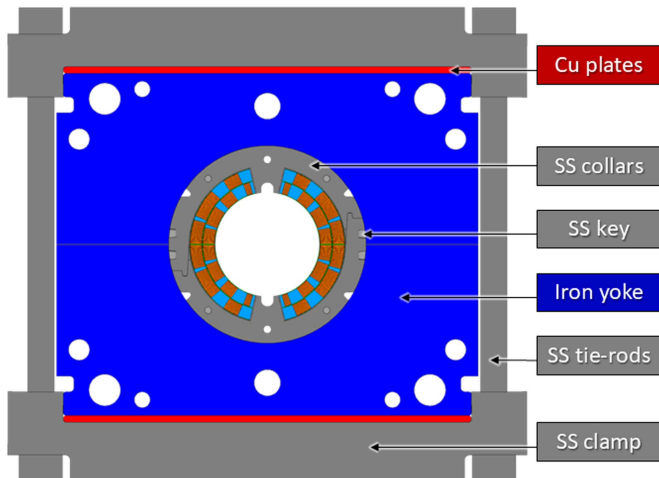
Optimized 2D cross-section showing the main magnet components.
